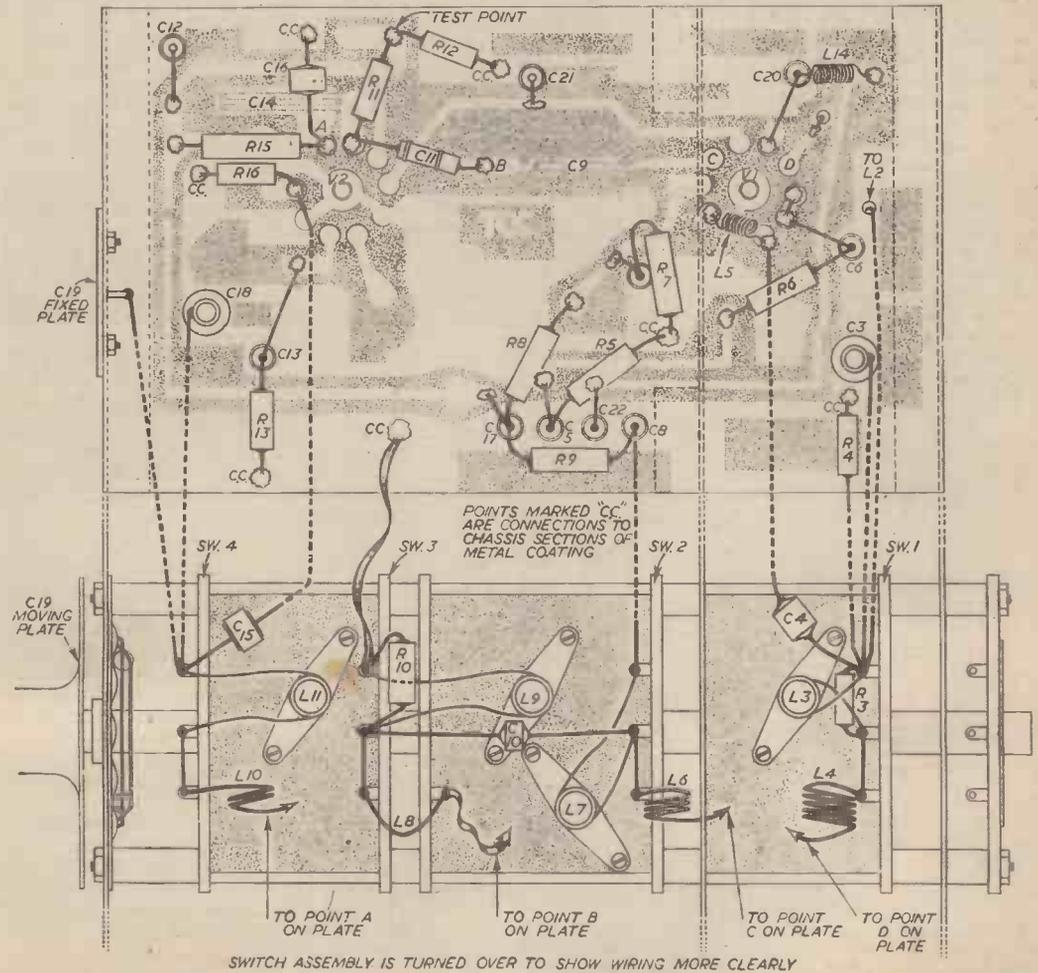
Essential wiring details—to be read in conjunction with Fig. 9.
